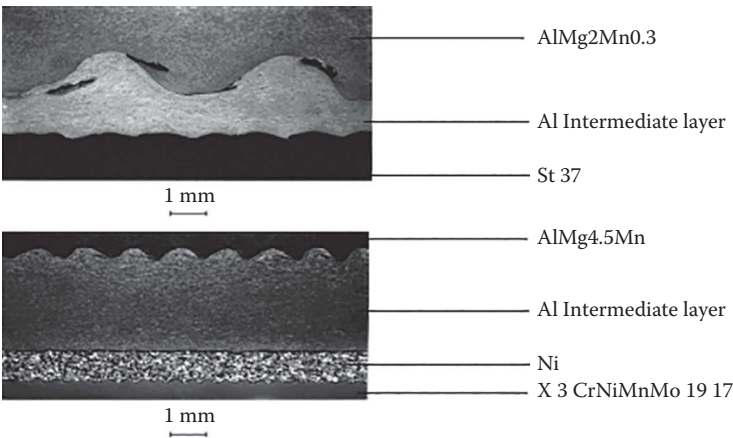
Macrostructure of explosive welded joints^[24]
